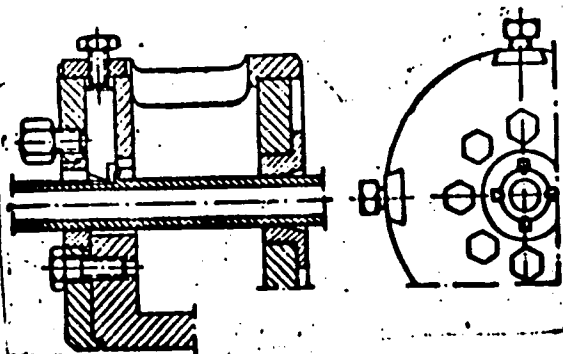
Yoke for drawing longitudinal channels on the outer surface of pipes.
